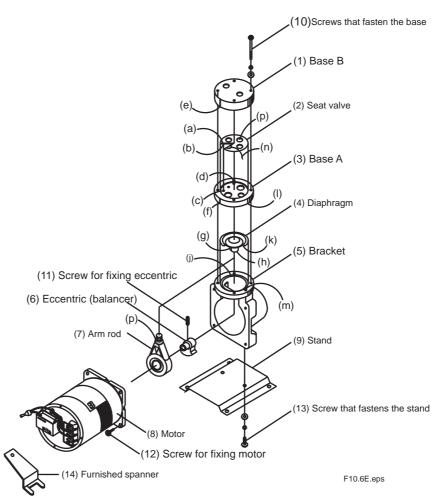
Exploded View of Diaphragm-type Aspirator
